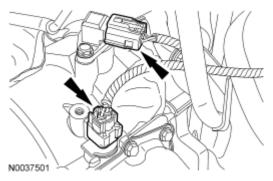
Locating Transaxle Control Electrical Connectors Courtesy of FORD MOTOR CO.
